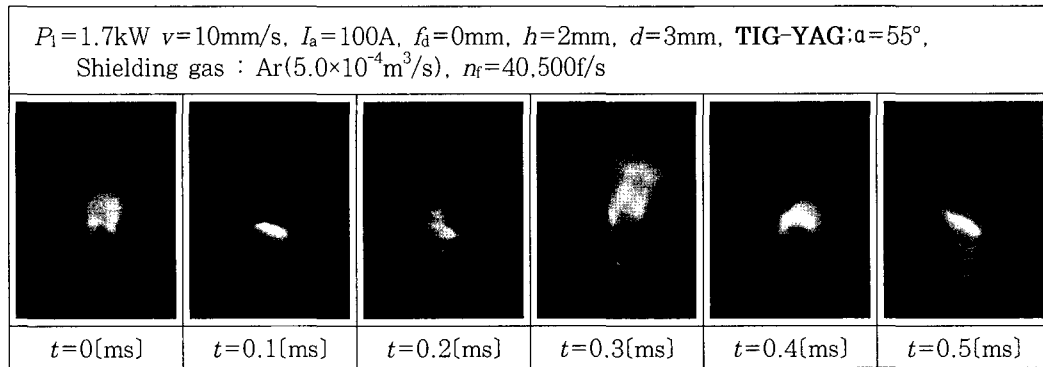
High speed photographs of arc and plasma/plume of STS304 during TIG-YAG hybrid welding
